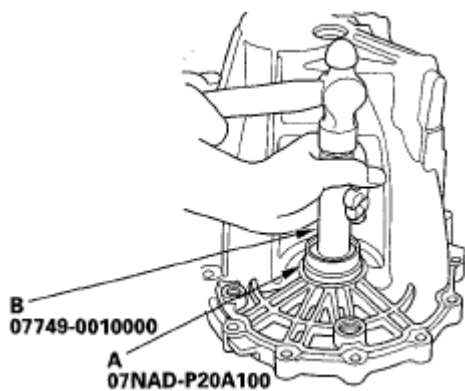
Installing Oil Seal, Oil Seal Driver And Driver
